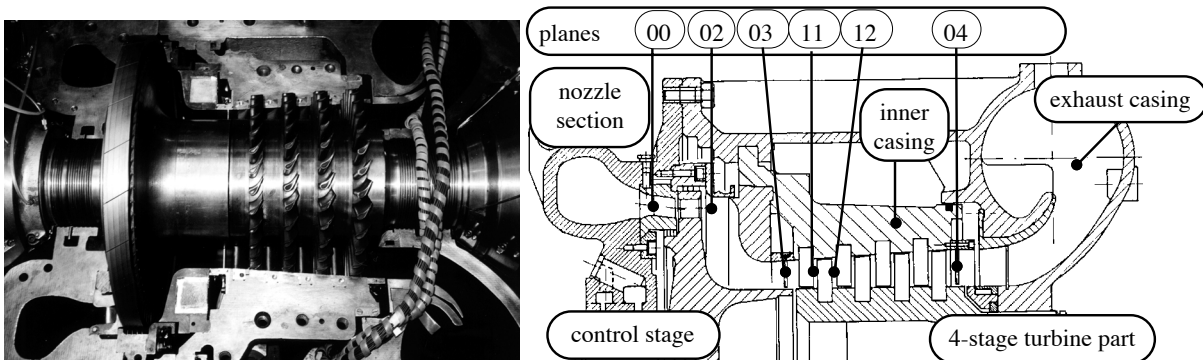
Photo and cross section of test turbine with definition of measuring planes
